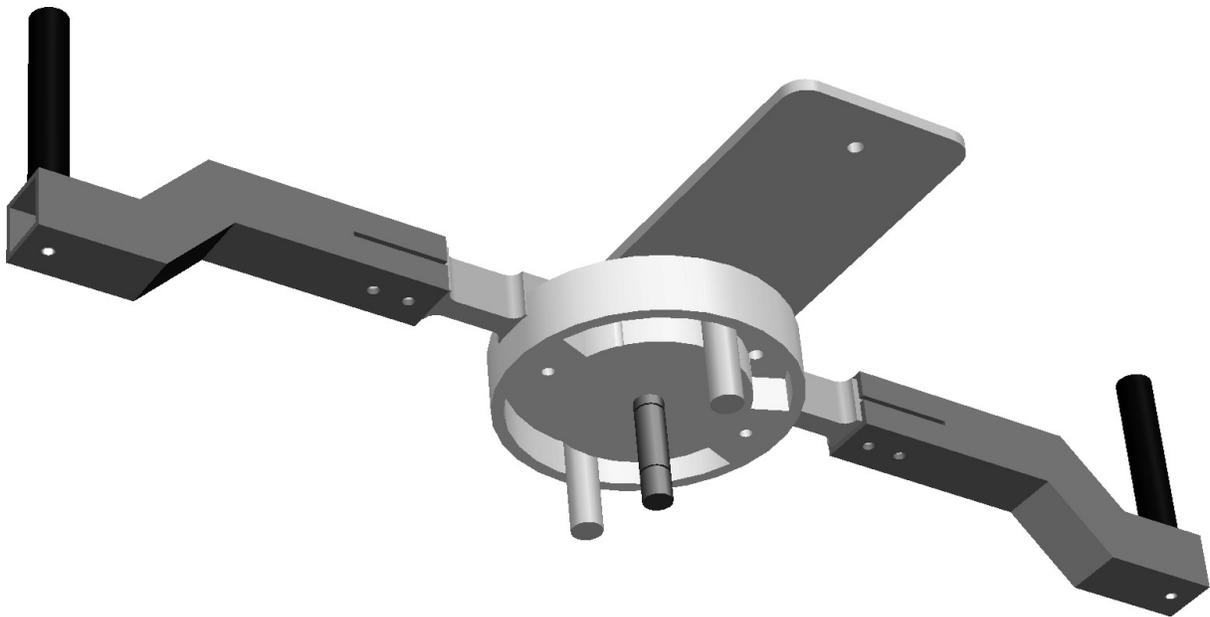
View of the crank handle bars from underneath. This reveals the groove in the bottom of the top plate that prevents the crank from spinning in a complete circle. The removable stopper shafts are mounted to the bottom plate (not shown) to limit the range of motion.
